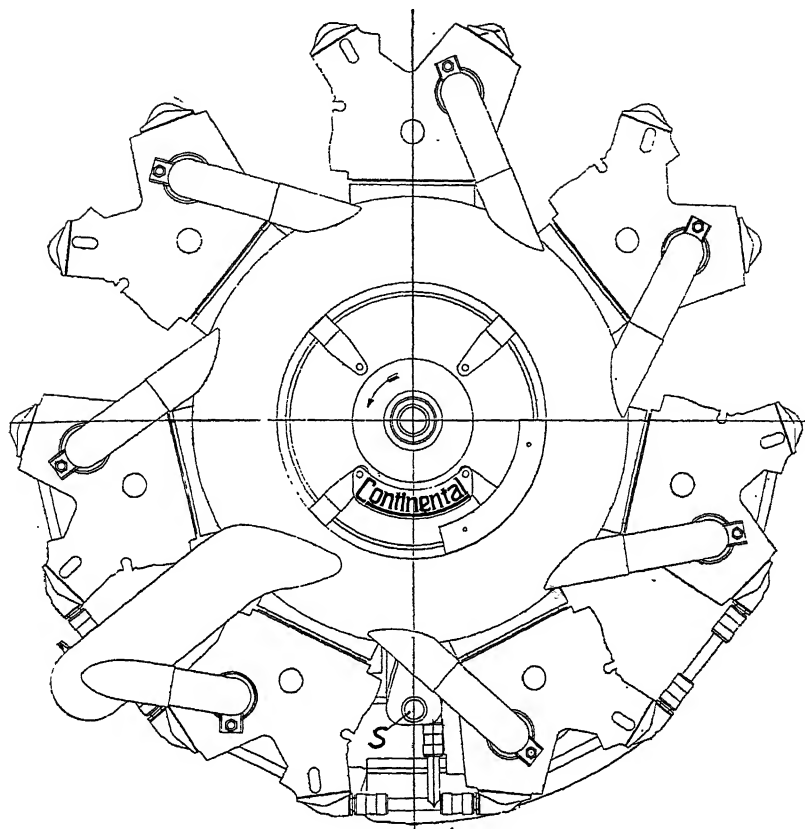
DIAGRAMMATIC VIEW OF FRONT OF CONTINENTAL "W670" ENGINE
